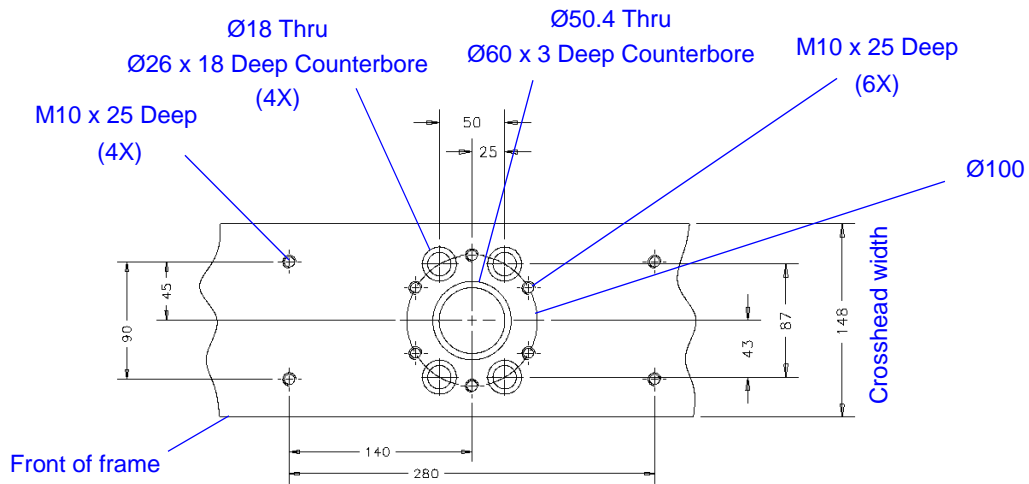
Series 5584 and 5585H Second Test Space Configuration - Fixed Crosshead Mounting Dimensions
